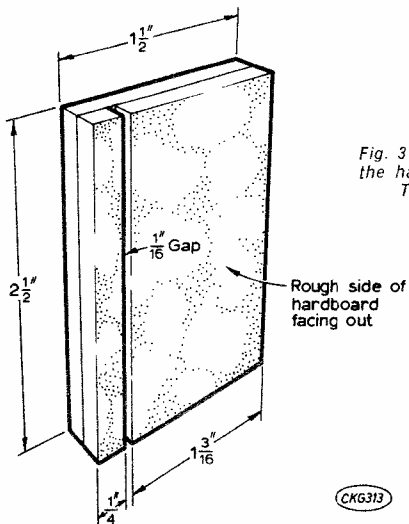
The dimensions of the hardboard side fillets. Two are required.
